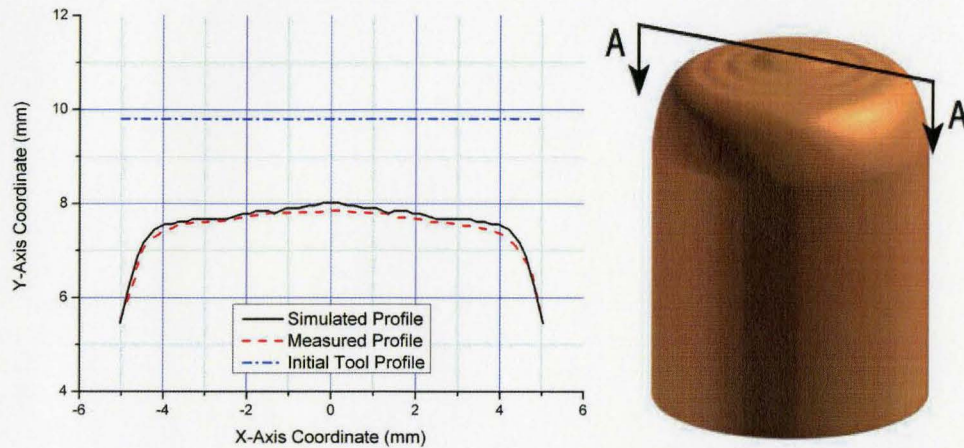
Cylindrical Tool Profile Along Section A-A and 3D of the wear pattern.
